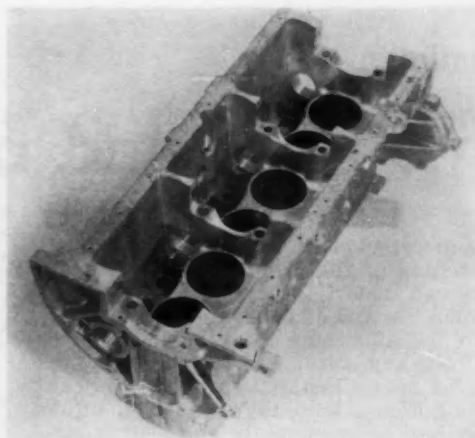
In Chrysler Corp.'s aluminum engine design, the crankshaft is supported by replaceable upper and lower cast iron main bearing caps.
